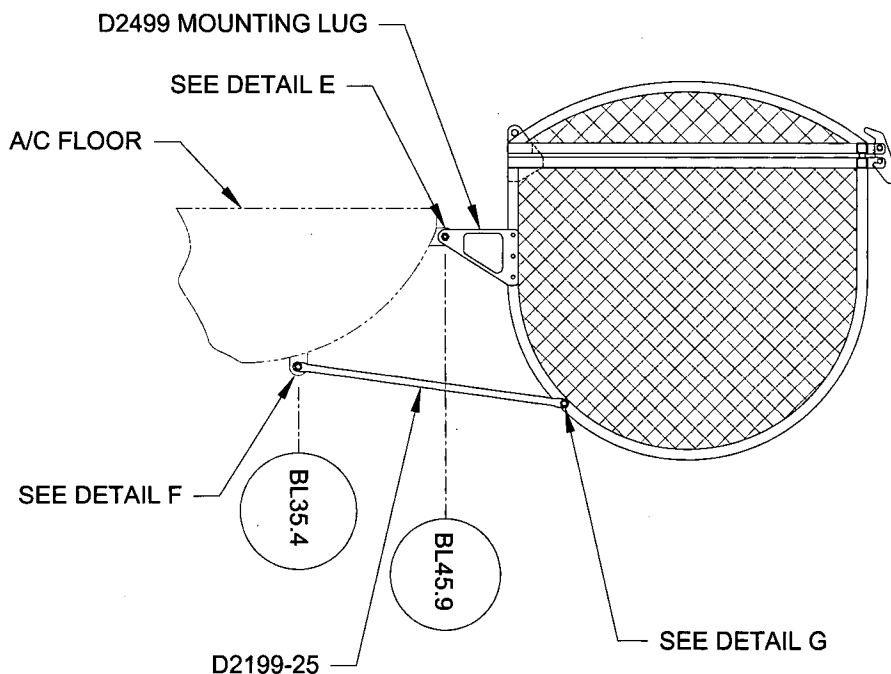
Section B-B Looking Fwd at STA 129.00
